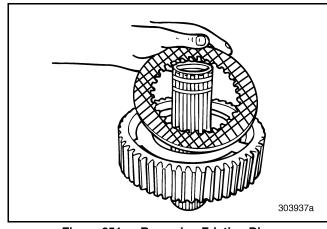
Removing Friction Disc (T313L/T318L Shown)
